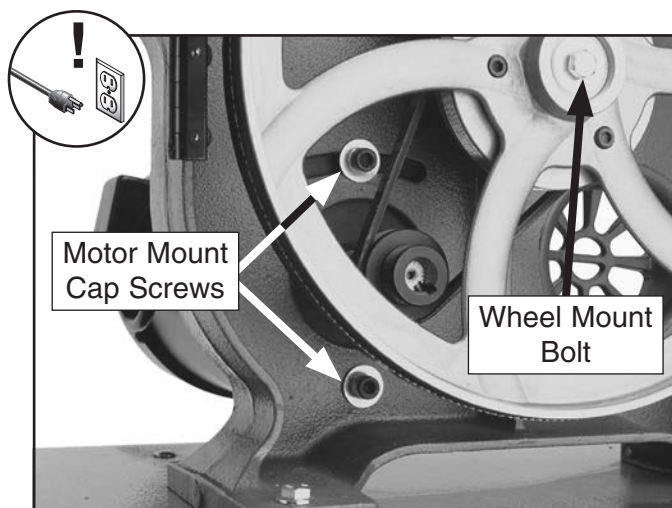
Locations of the wheel mount bolt, and motor mount cap screws.
